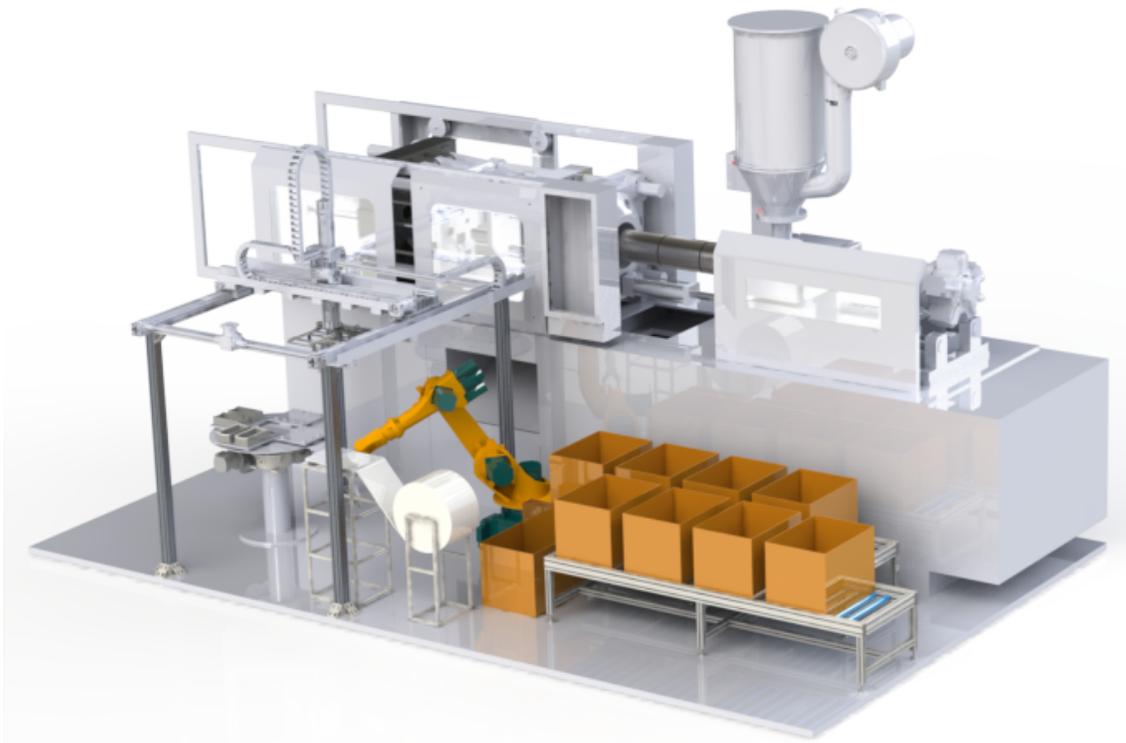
Isometric view for 4-station rotary indexing table layout assembly
